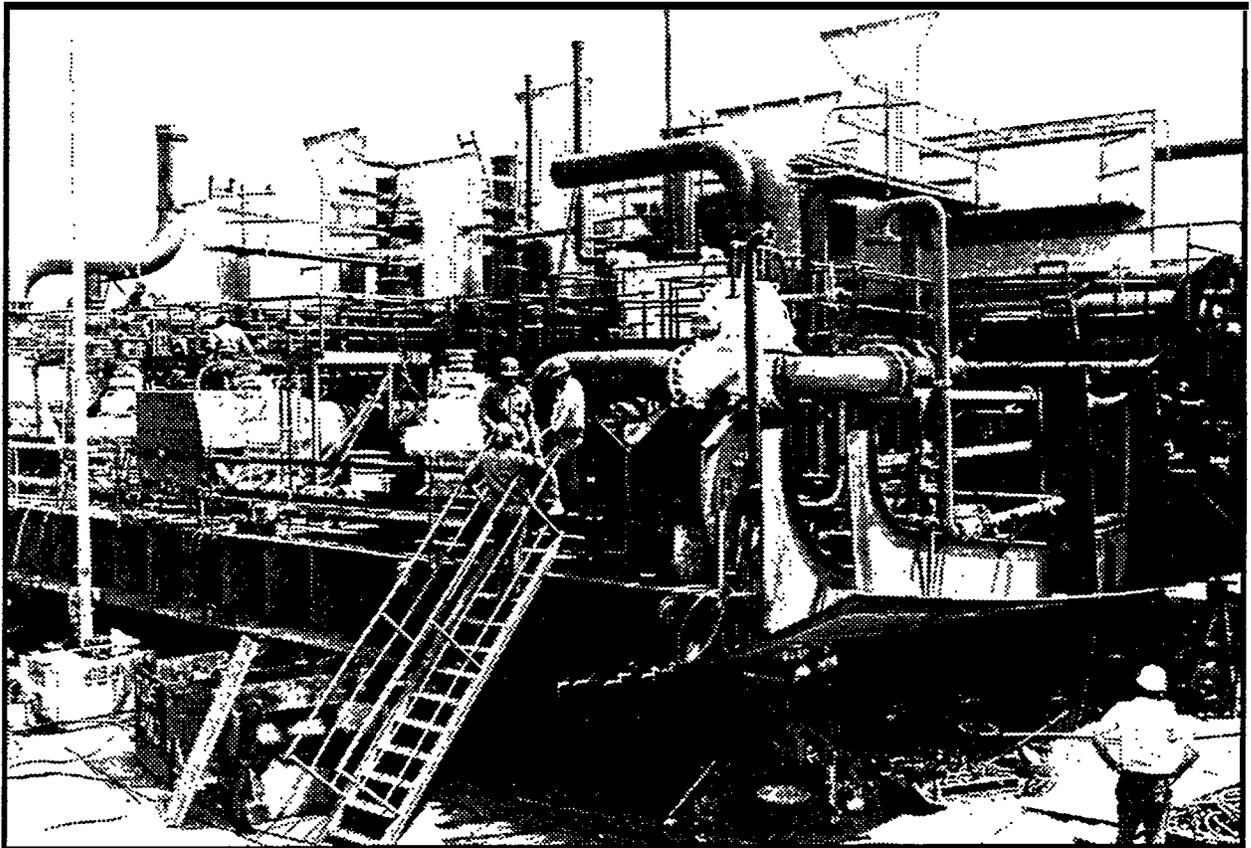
On-block outfitting, notice the amount of outfitting materials that are installed (e.g., pumps, pipes, ladders, walkways, etc.) and notice the access to the equipment at this stage in the construction process.
